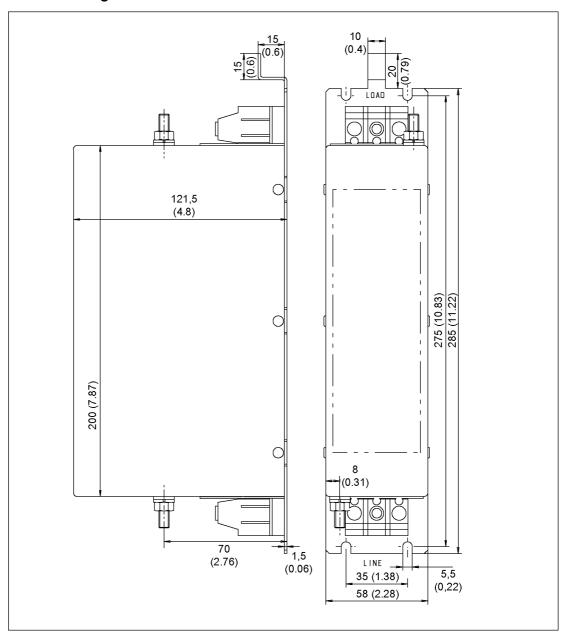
Dimension drawing: line filters for Smart Line Modules (5 and 10 kW)
